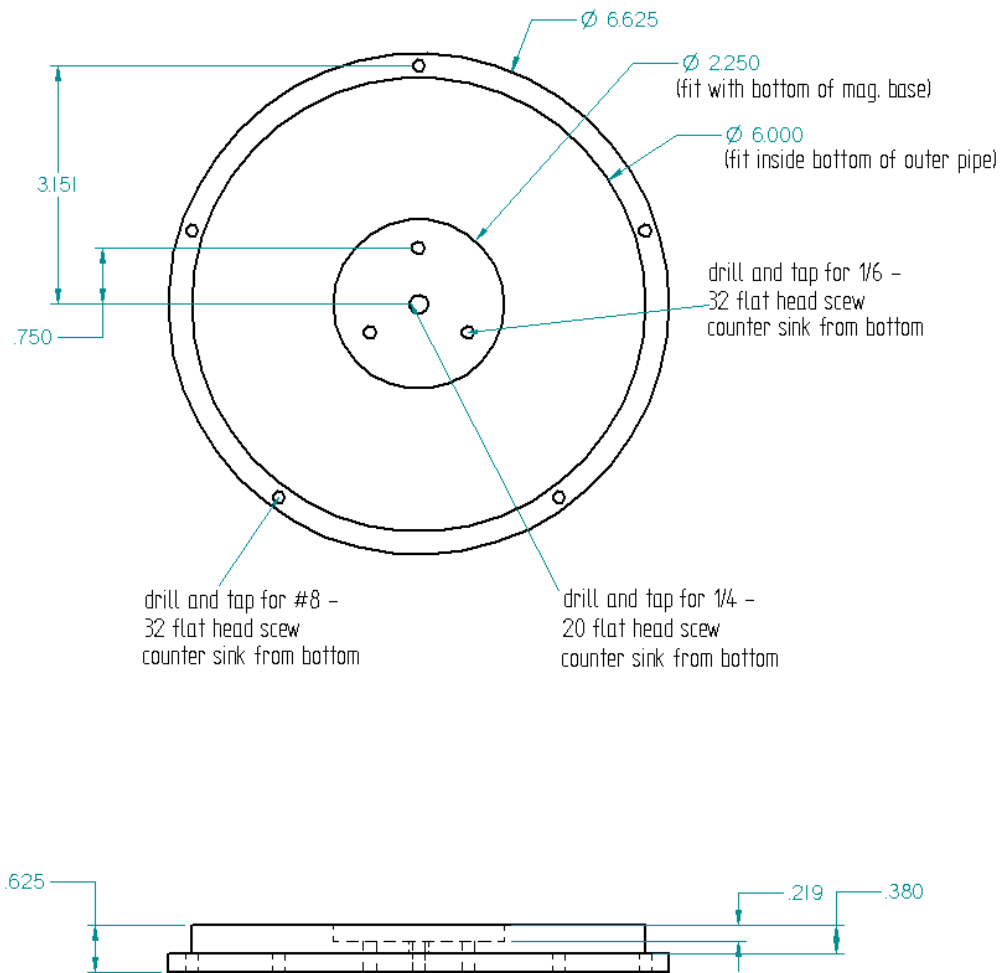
Bottom plate made from AISI 1018 magnetic steel.
